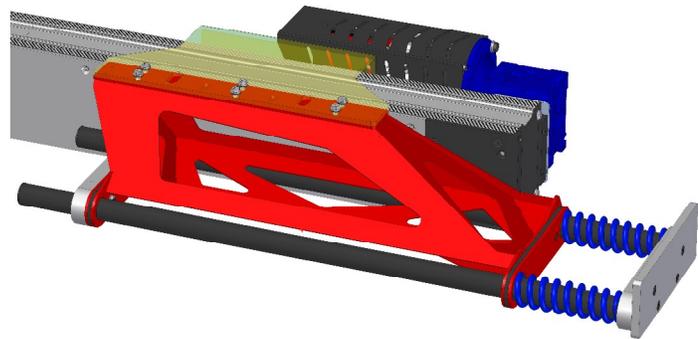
Spring Buffer Heavy Duty LEFT-hand
